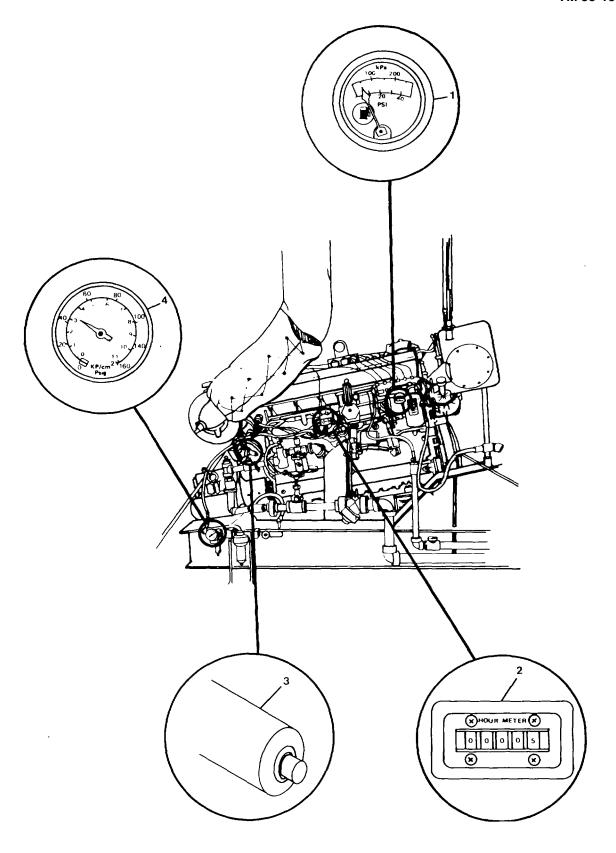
Bow Thruster Engine Controls (Sheet 1 of 2).
